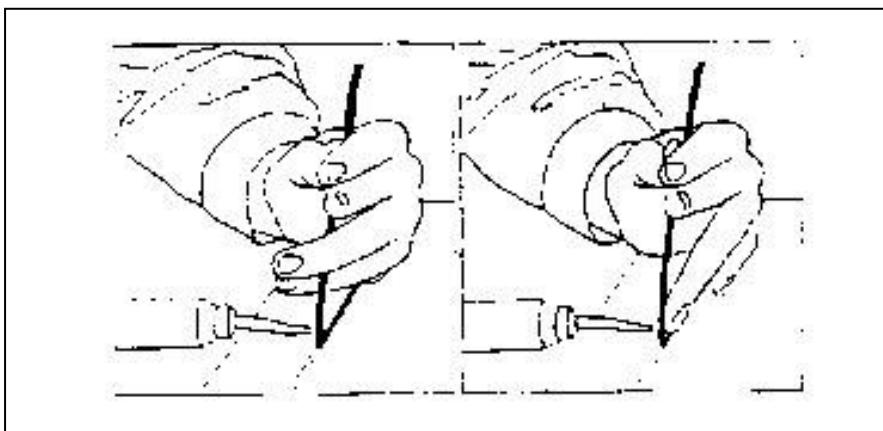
Methods of Re-positioning Grip on Welding Rod.
